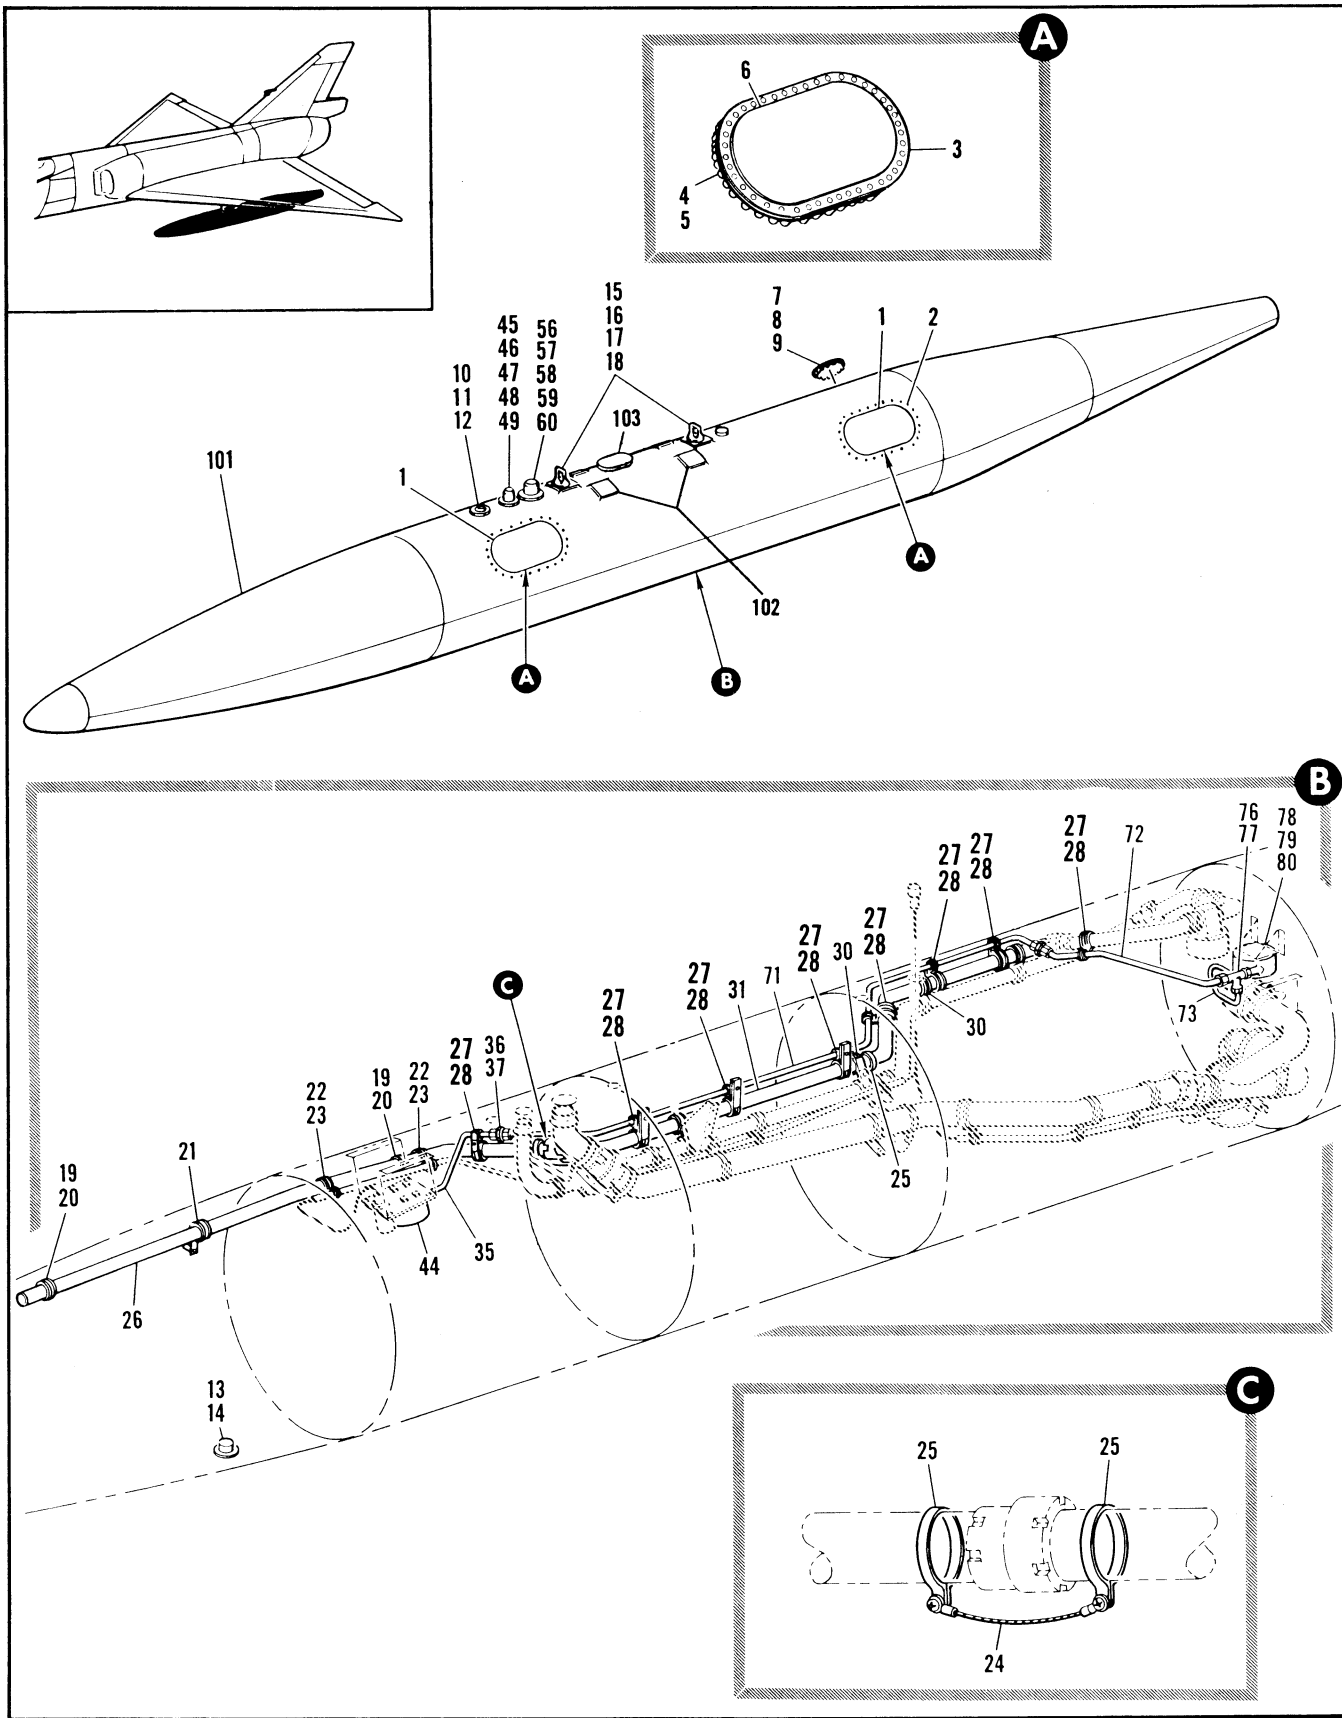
External Fuel Tank Assembly (Sheet 1 of 5)
